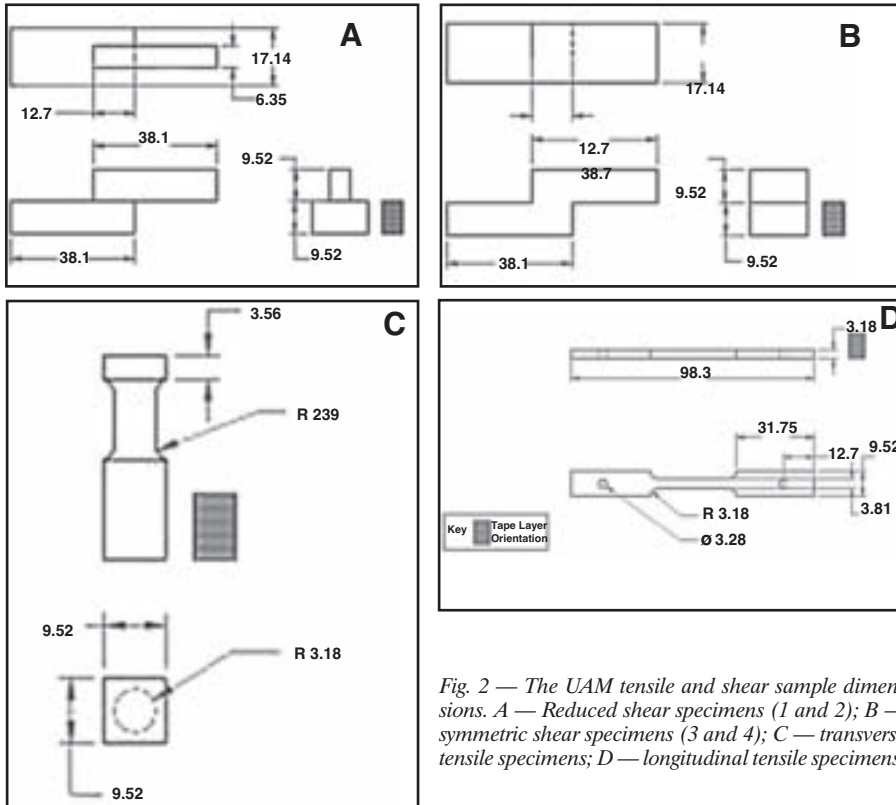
The UAM tensile and shear sample dimensions. A — Reduced shear specimens (1 and 2); B — symmetric shear specimens (3 and 4); C — transverse tensile specimens; D — longitudinal tensile specimens.
